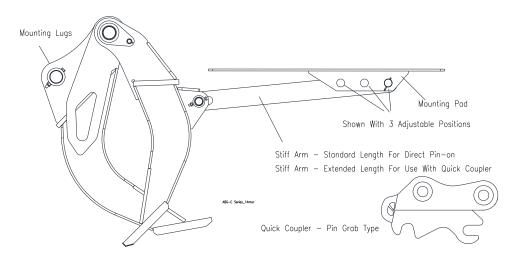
Stiff Arm – Standard / Extended with 3-Hole Mounting Pad
